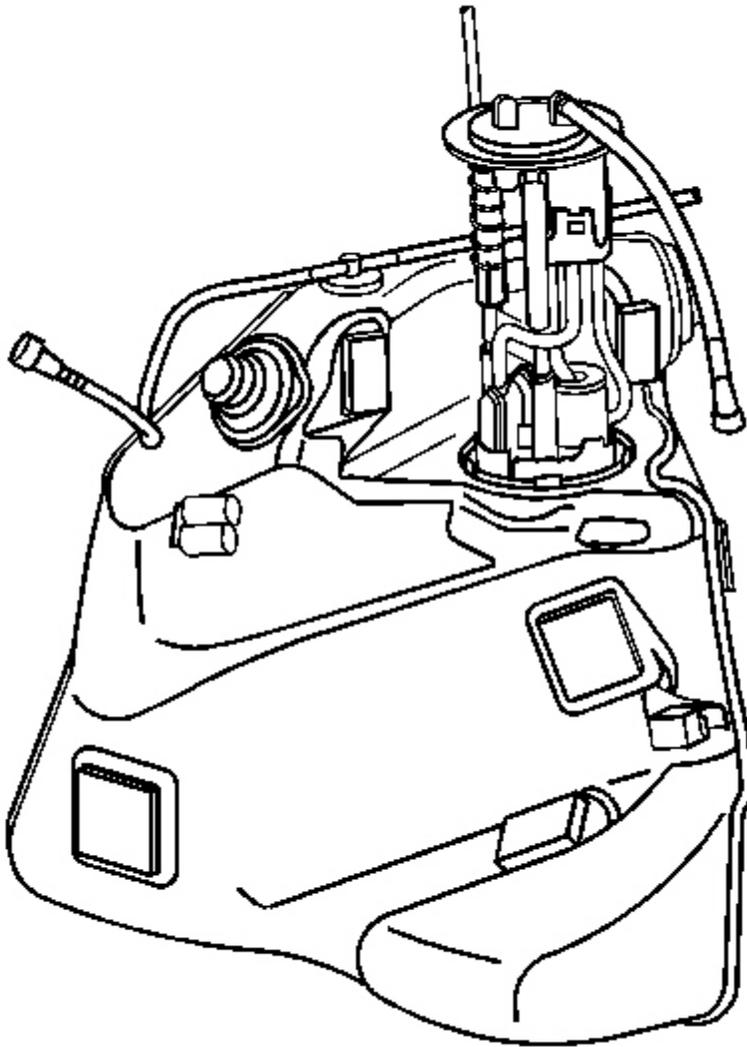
Crossover Tube To Fuel Tank O-Rings & Alignment Feature
